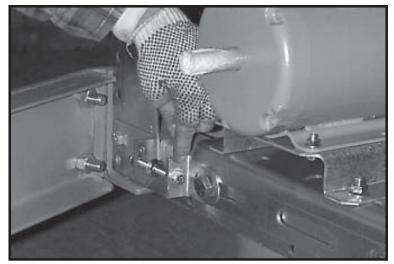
RH front of dryer - Tightening bolt adjusts belt tension (with washer on outside).
